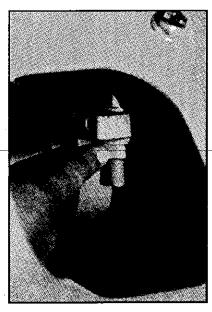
ONE OF THE FOUR BOLTS TO LOOSEN TO ADJUST 3V BELTS
